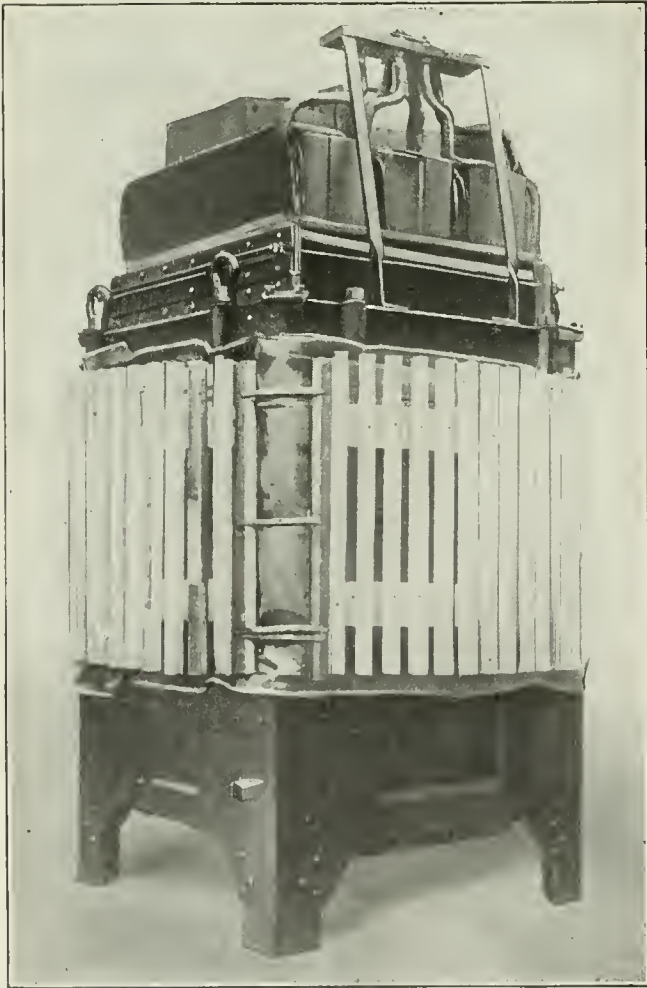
TRANSFORMER READY TO PLACE IN TANK
